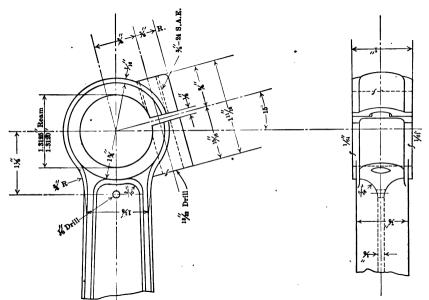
Upper end of connecting-rod of Mack engine $(4'' \times 5'')$.
